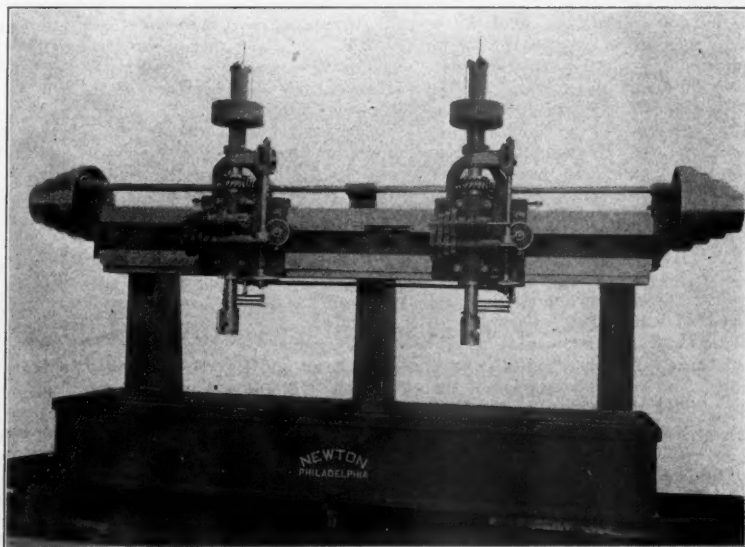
The Newton Double Spindle Locomotive Rod Boring Machine.
